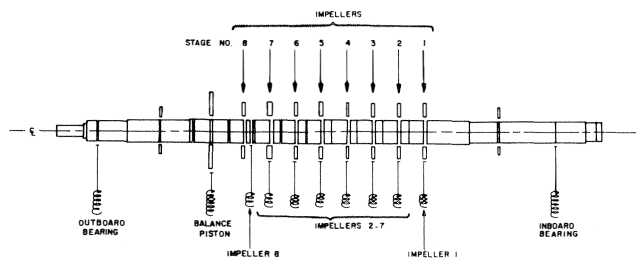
Pump Rotor Model Showing Locations of All Eleven Effective Bearings.
